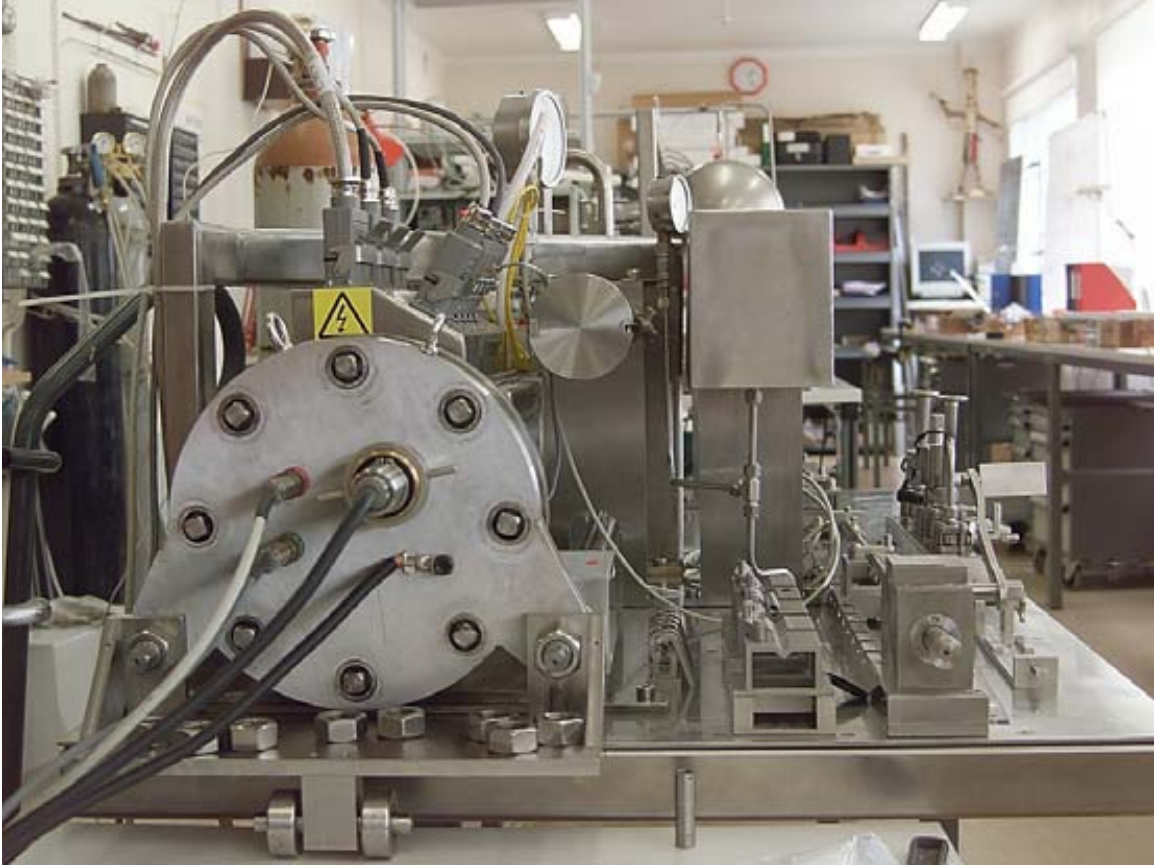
, Re-instrumentation equipment used for welding of instrumented end plugs onto pre-irradiated fuel rod segments.
